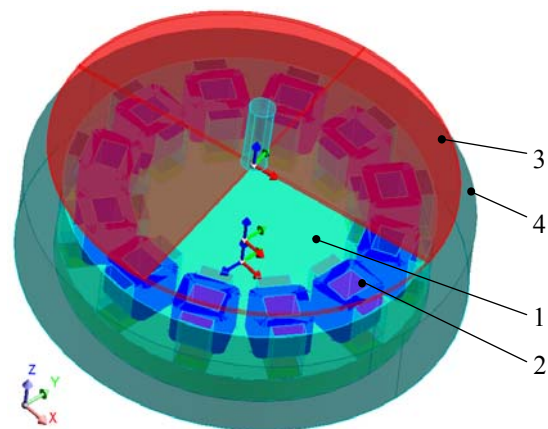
General view of the ECRR prototype – 3D representation: 1- insulating support; 2- electromagnetic actuator (EA); 3- disk-shaped rolling rotor; 4- rolling path.
